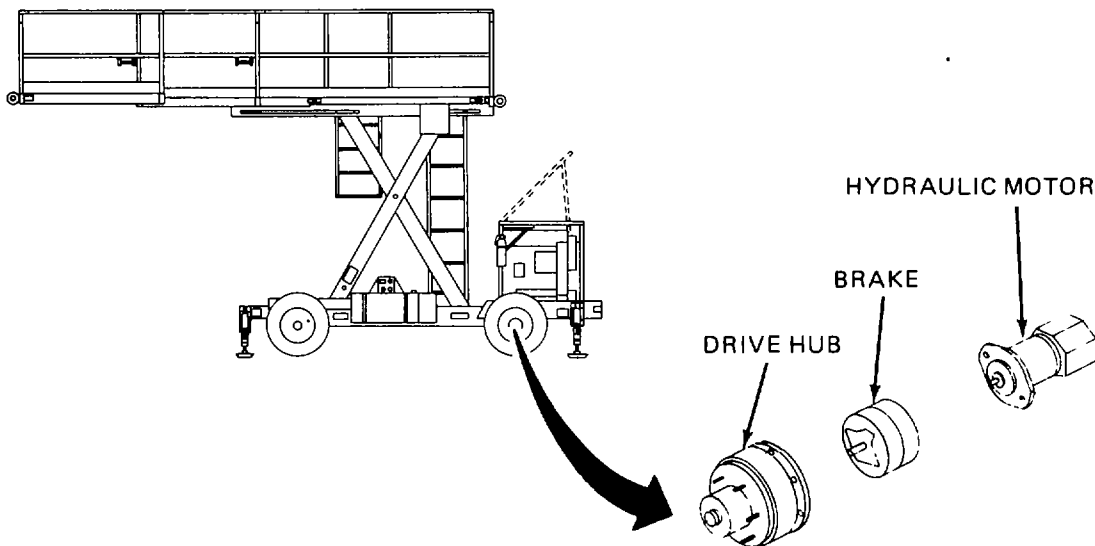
Hydraulic Motor, Brake, and Drive Hub Assembly.
